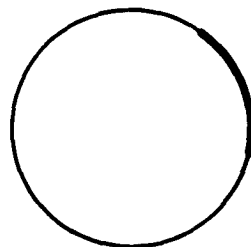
Teardown Wear Patterns (Rear View); Sixth-Stage High-Pressure Compressor Outer and Inner Air Seals. (J23976-6)
